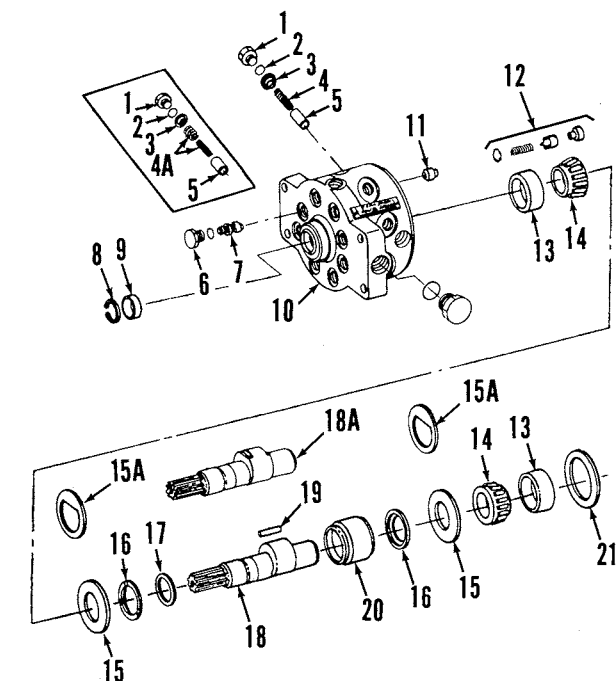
Exploded view of main hydraulic pump used on all models. Refer to Fig. 232 for pump stroke control components.
